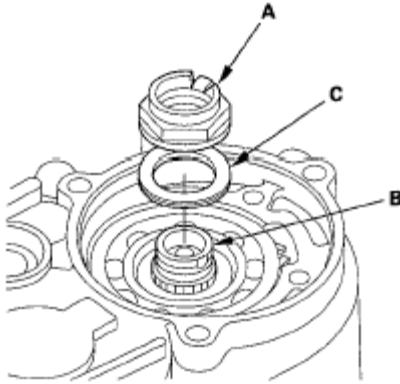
Identifying Mainshaft Locknut And Lock Washer
